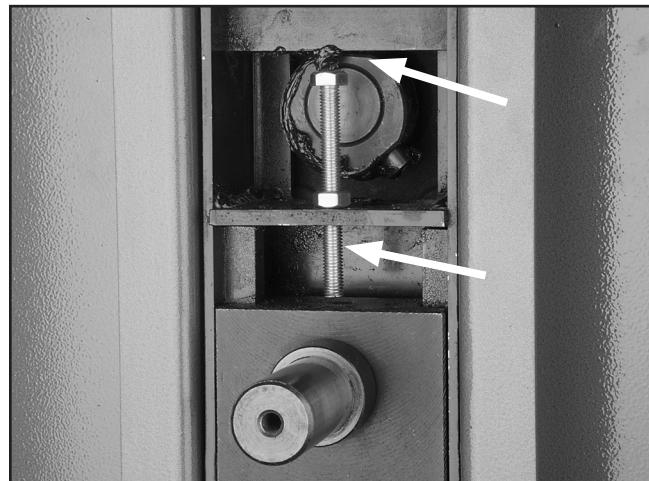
Tension adjustment assembly locations (top wheel removed for clarity).
